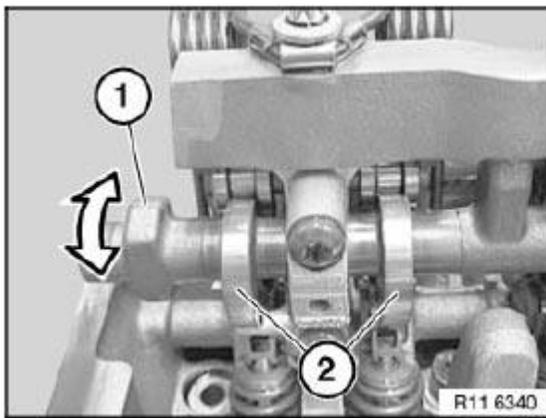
Identifying Eccentric Shaft With Mounting Screws
